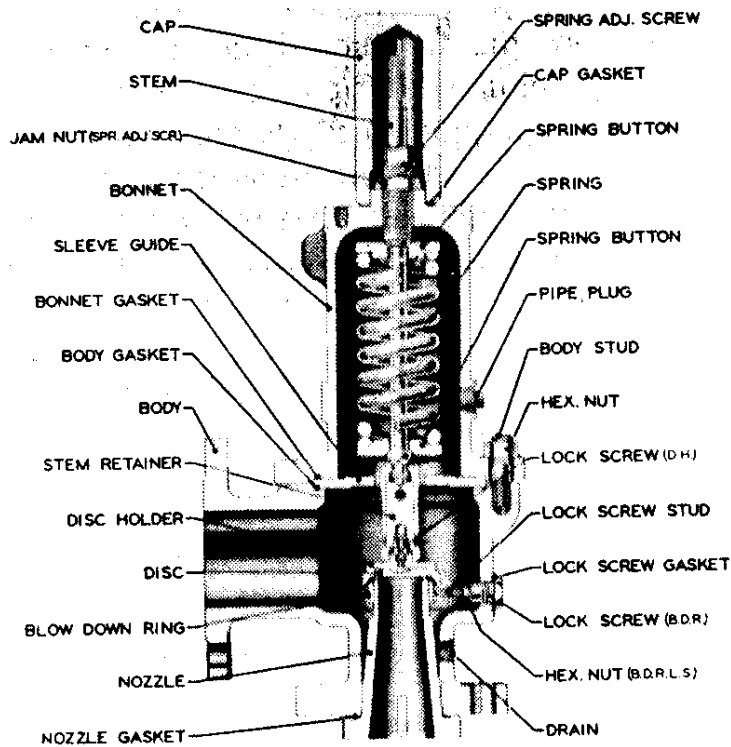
Internal parts such as disc holder, sleeve guide, stem retainer and blowdown ring are made of stainless steel or other alloy.
